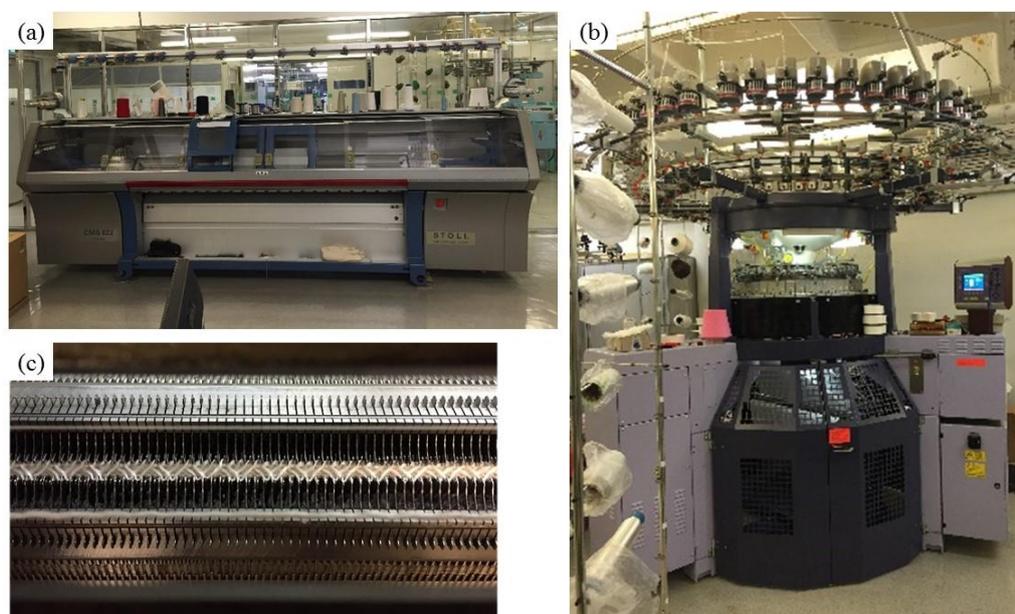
(a) A STOLL computerized flat knitting machine; (b) a Terrot double jersey circular machine; (c) knitting a spacer fabric on the computerized flat
